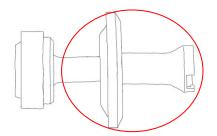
Drawing of Check Valve for Variable Displacement Air-conditioner Compressor
